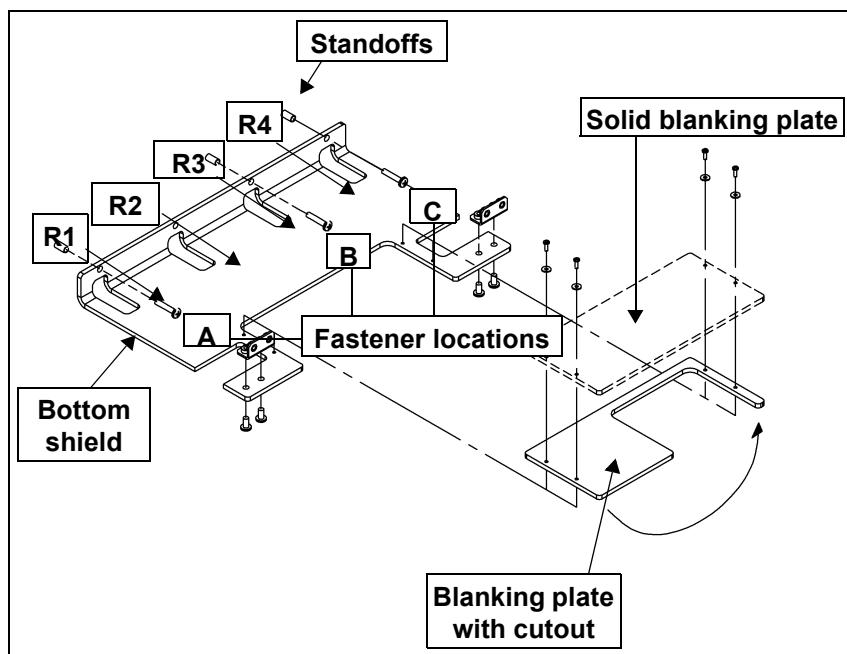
Right side bottom shield with solid and cutout blanking plates
